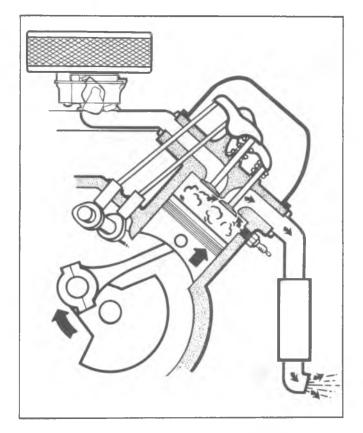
Exhaust Stroke (Gasoline Engine)
